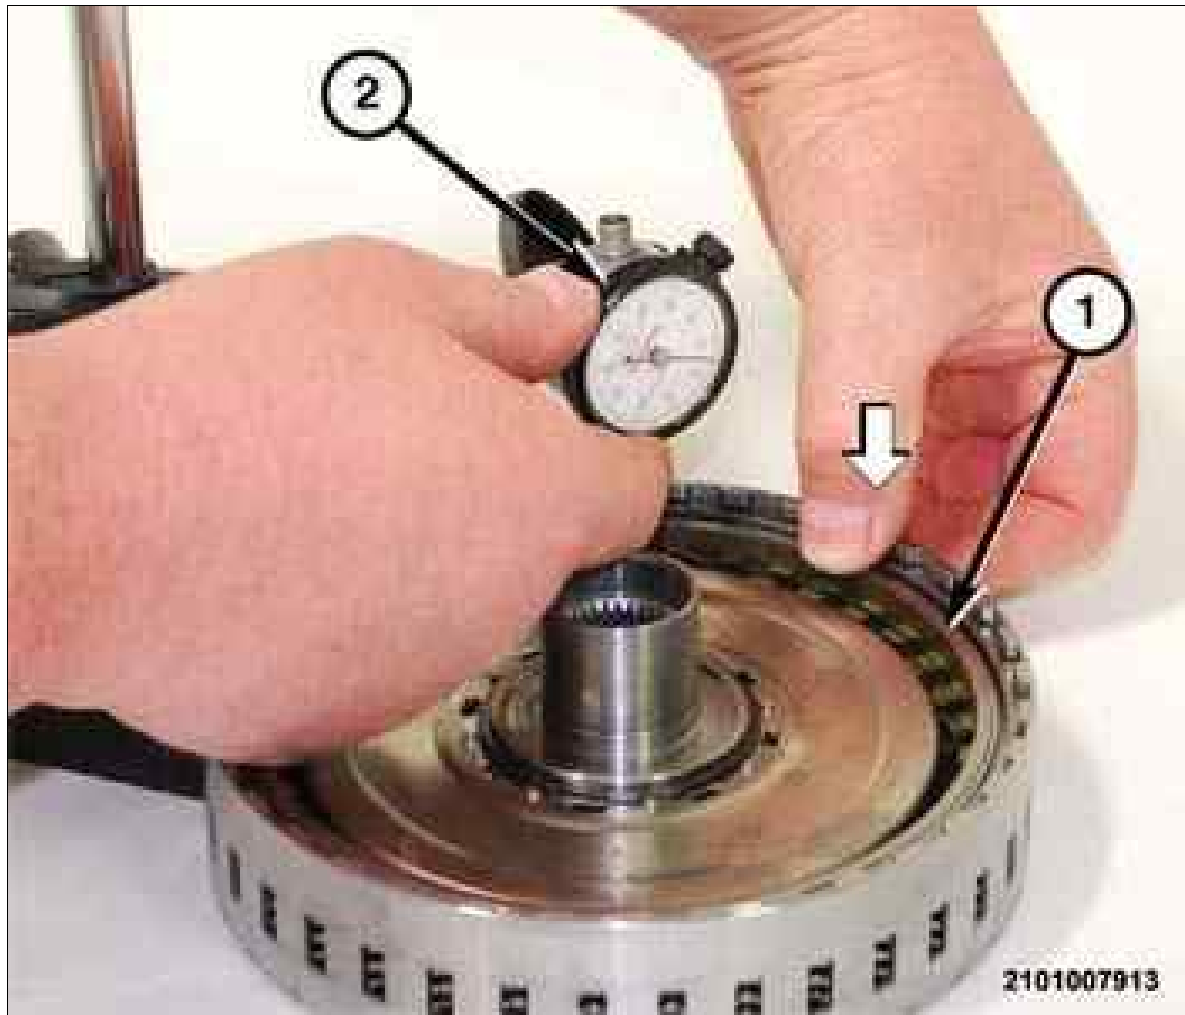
Dial Indicator, Magnetic Base, E-Clutch Retainer, Friction Plate & Screw Drivers
